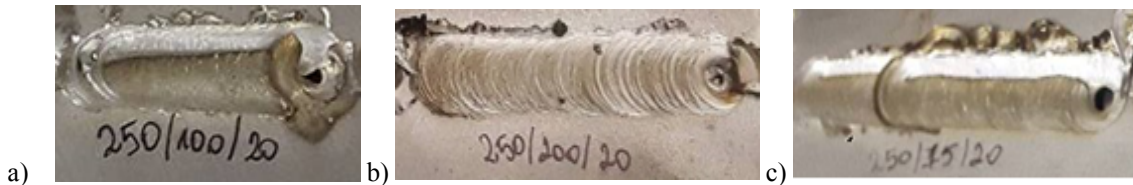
Pictures of welds obtained during selection of welding parameters: a) 250 rpm/min, 100 mm/min; b) 250 rpm/min, 200 mm/min; c) 250 rpm/min; 75 mm/min; argon
